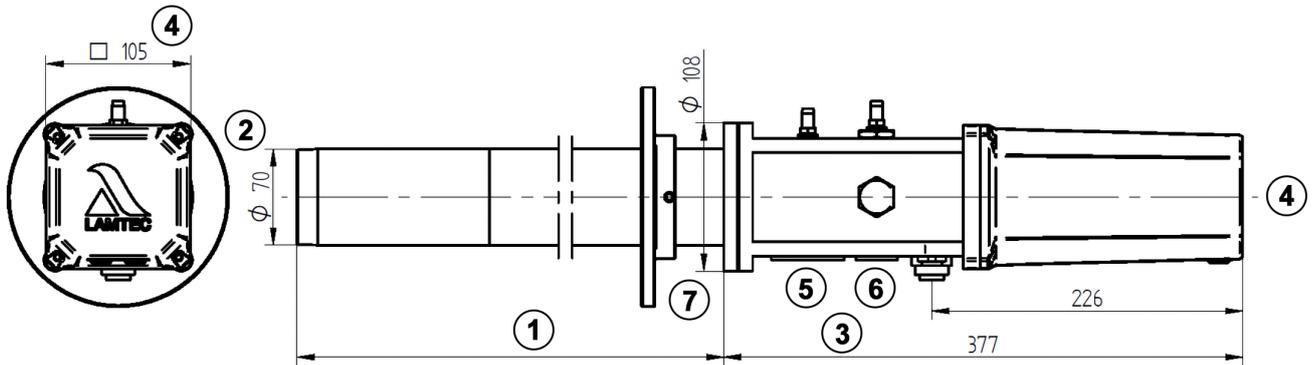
Dimensions of GF170 pilot burner design A/B (dimensions in mm)
